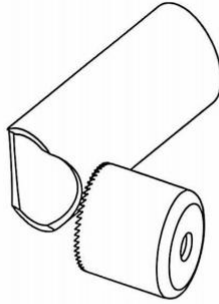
Proper amount of tubing to remove. Notice that the middle of the tube is not cut
